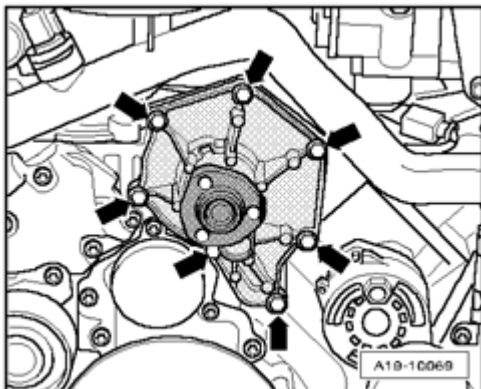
Removing Bolts For Coolant Pump And Coolant Pump
